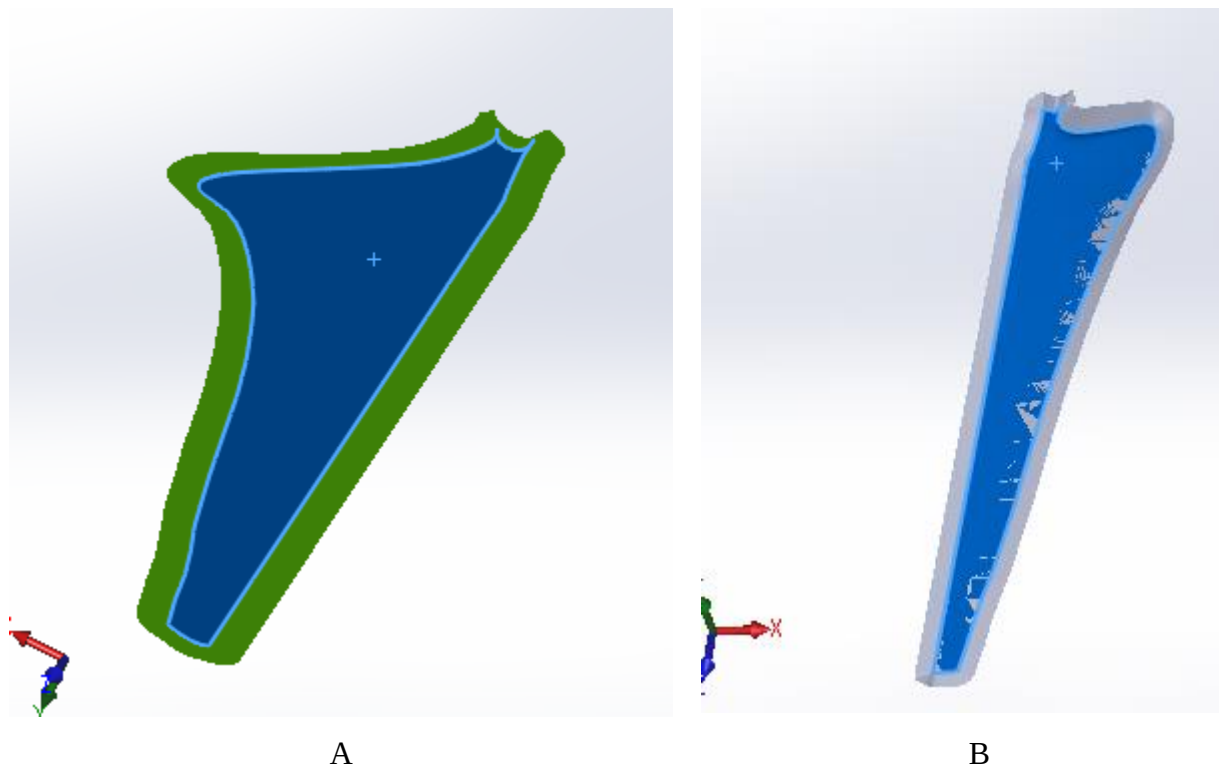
A= upper part mold, B= bottom Part Mold
